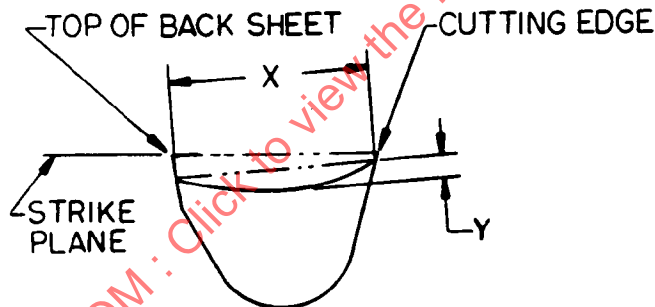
BUCKET WITH IRREGULAR SHAPED SIDE SHEETS
